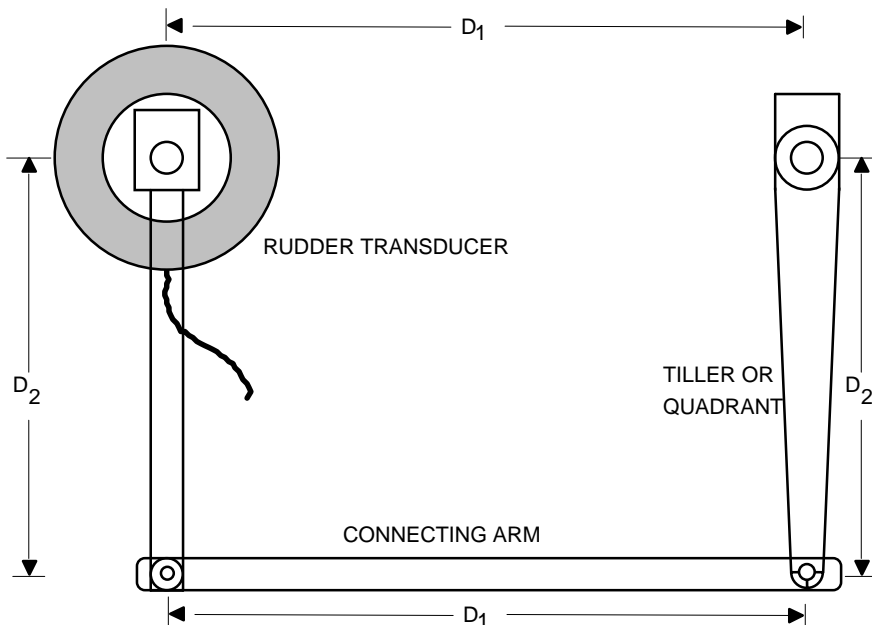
Rudder Transducer Linkage, Lay the cable back to the Controller and terminate it in the Rudder Transducer plug. (Fig 3.5)
